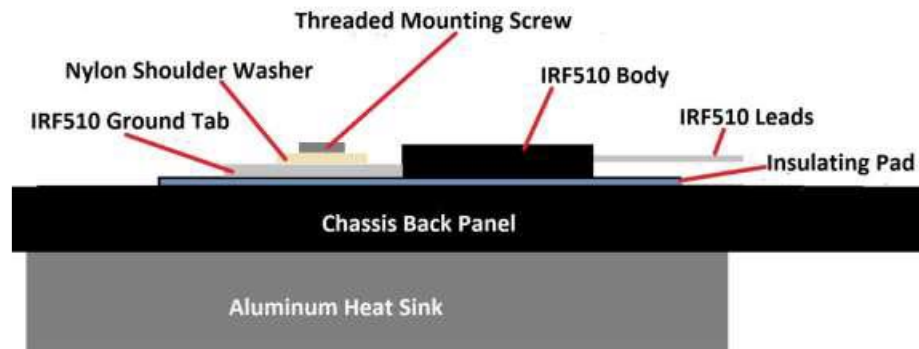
Mounting the IRF510 to the heat sink (side view).
